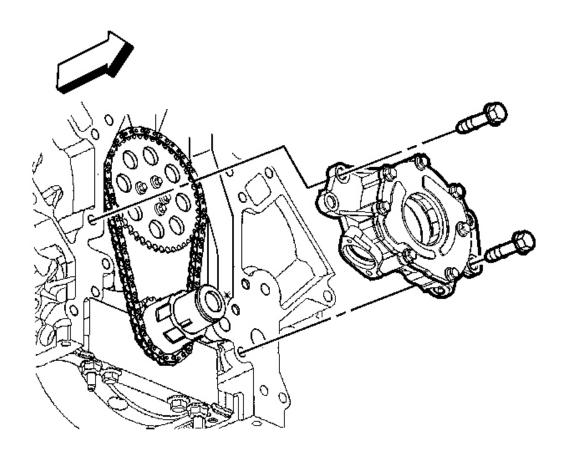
View Of Oil Pump & Bolt Courtesy of GENERAL MOTORS CORP.
